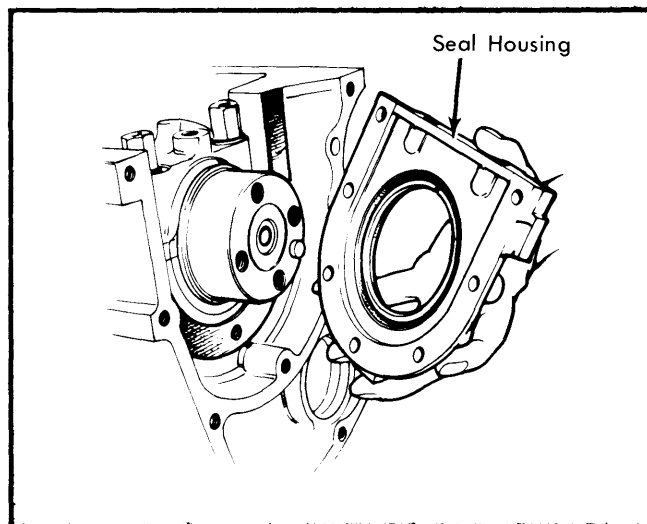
Fitting Rear Main Bearing Seal Housing into Place
